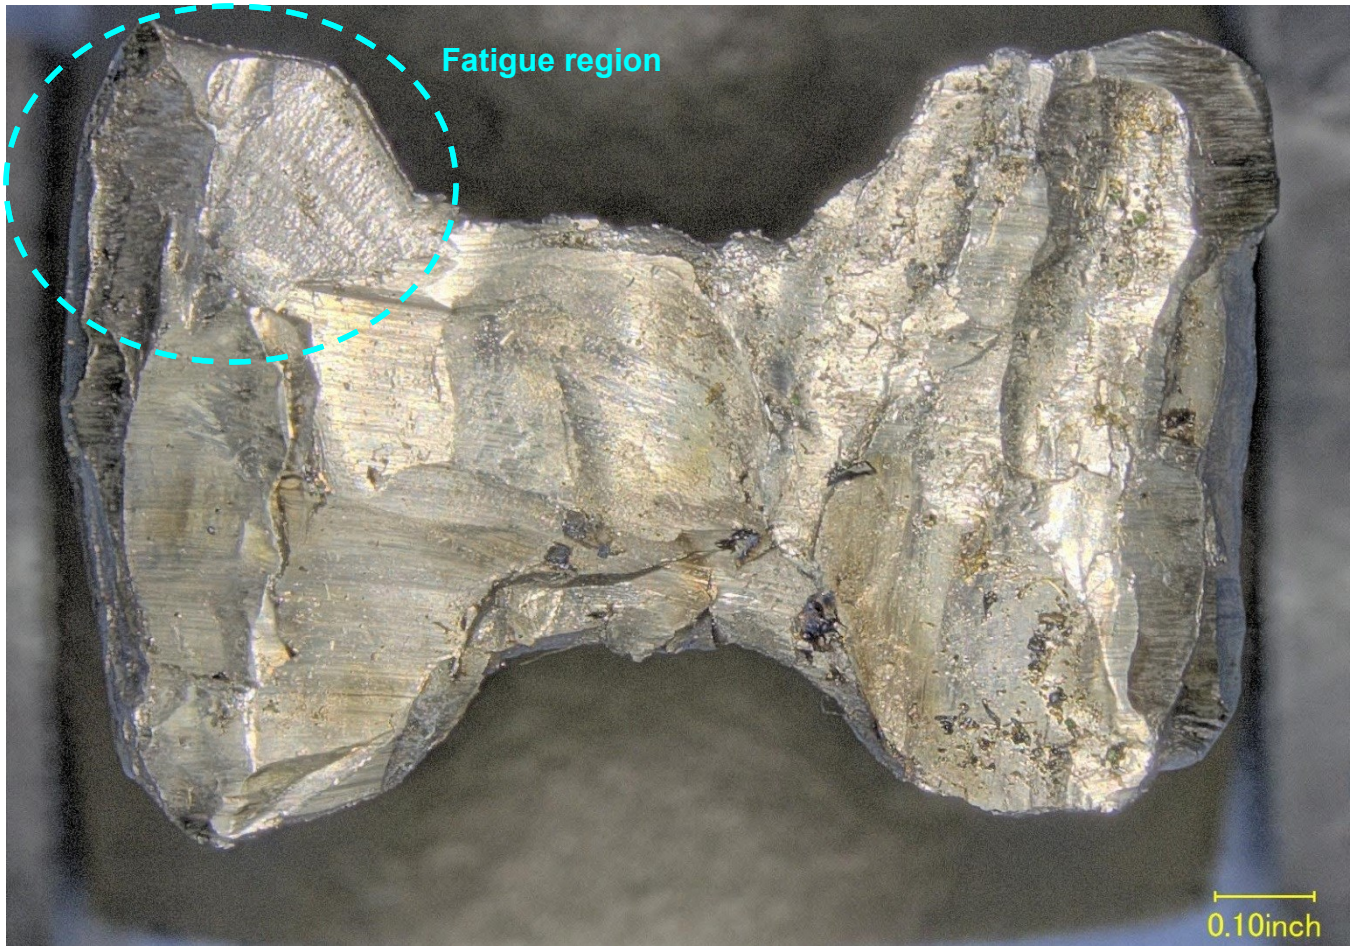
The fracture surface of the #1 connecting rod in the shank, from the piston pin end.
